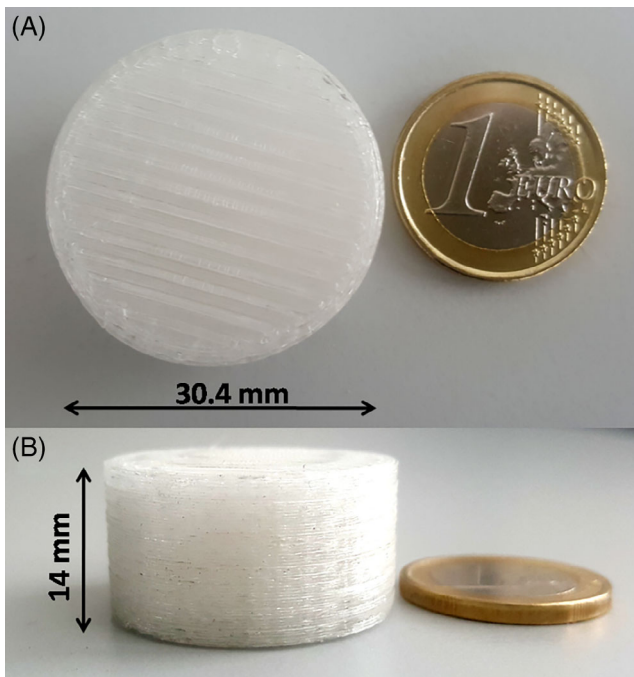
PMMA based dielectric microwave lens fabricated using 3D printing. Top view, A, Side view, B
